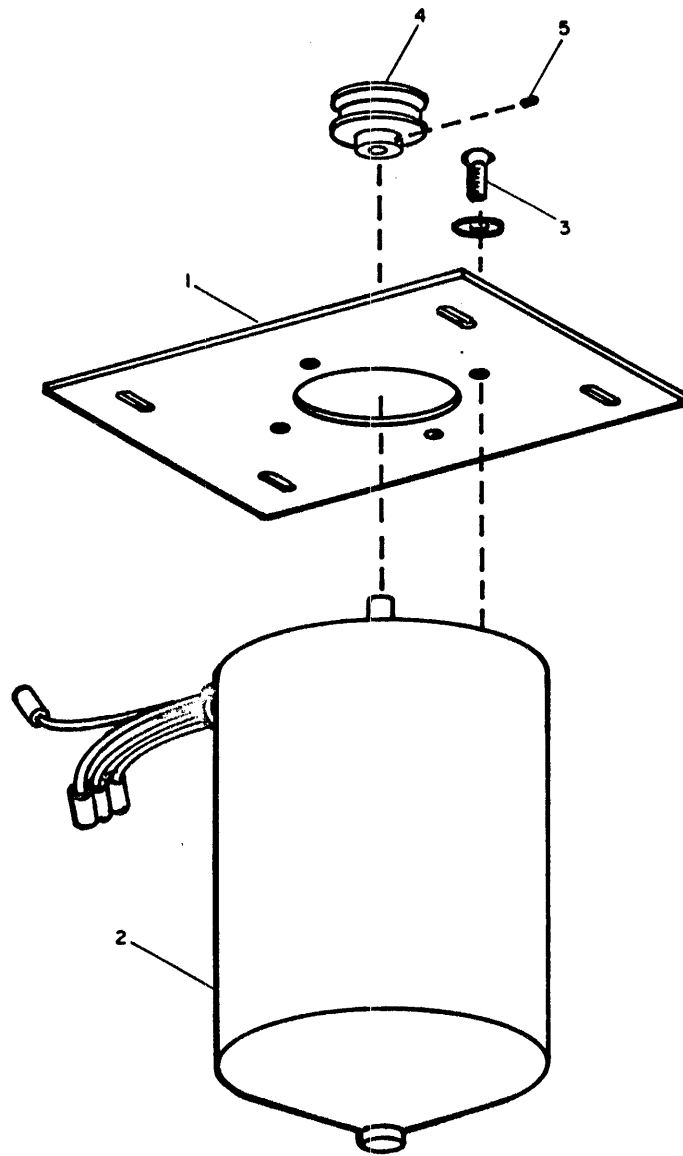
DRIVE MOTOR ASSEMBLY
